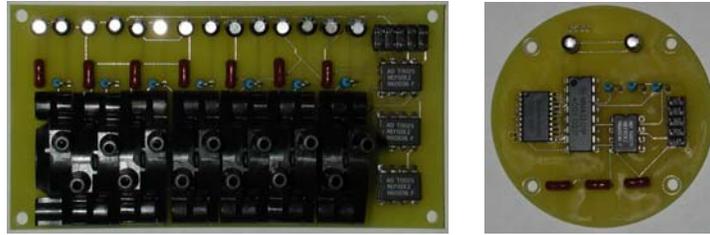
Electronics Example - Pressure Sensor and Accelerometer Boards
